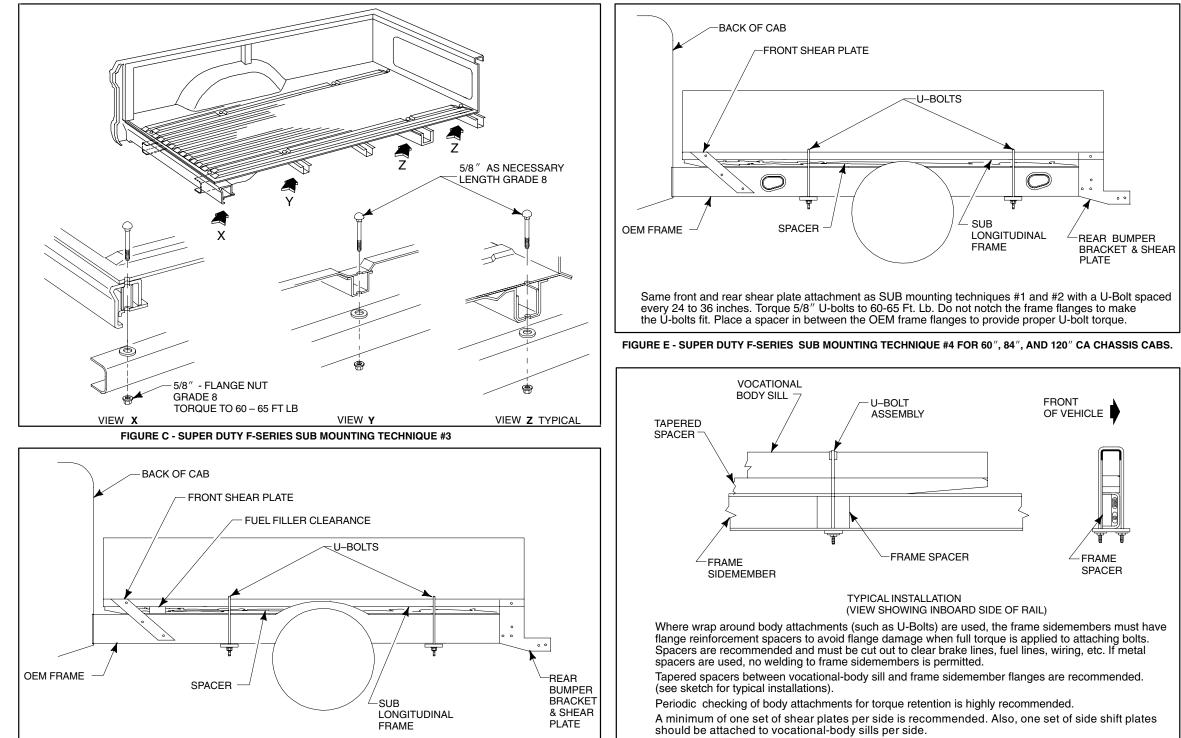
FIGURE D - SUPER DUTY F-SERIES SUB MOUNTING TECHNIQUE #4
